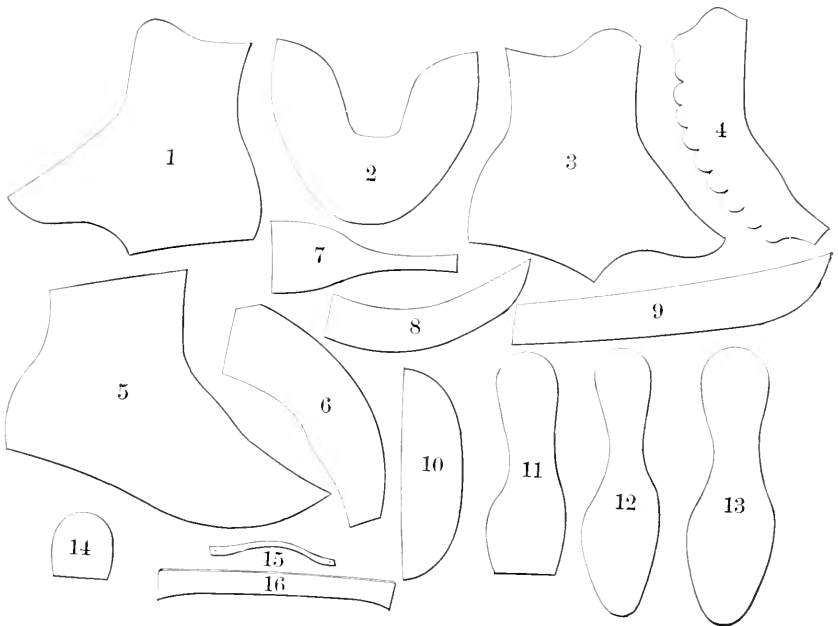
PARTS OF A BUTTON SHOE. 1. Large quarter; 2, vamp; 3, small quarter; 4, button piece; 5, drill lining; 6, glove button-piece lining; 7, heel lining stay; 8, button stay; 9, top stay; 10, heel stiffener; 11, sole lining; 12, inner sole; 13, outer sole; 14, heel lifts (six); 15, steel shank; 16, rand.
